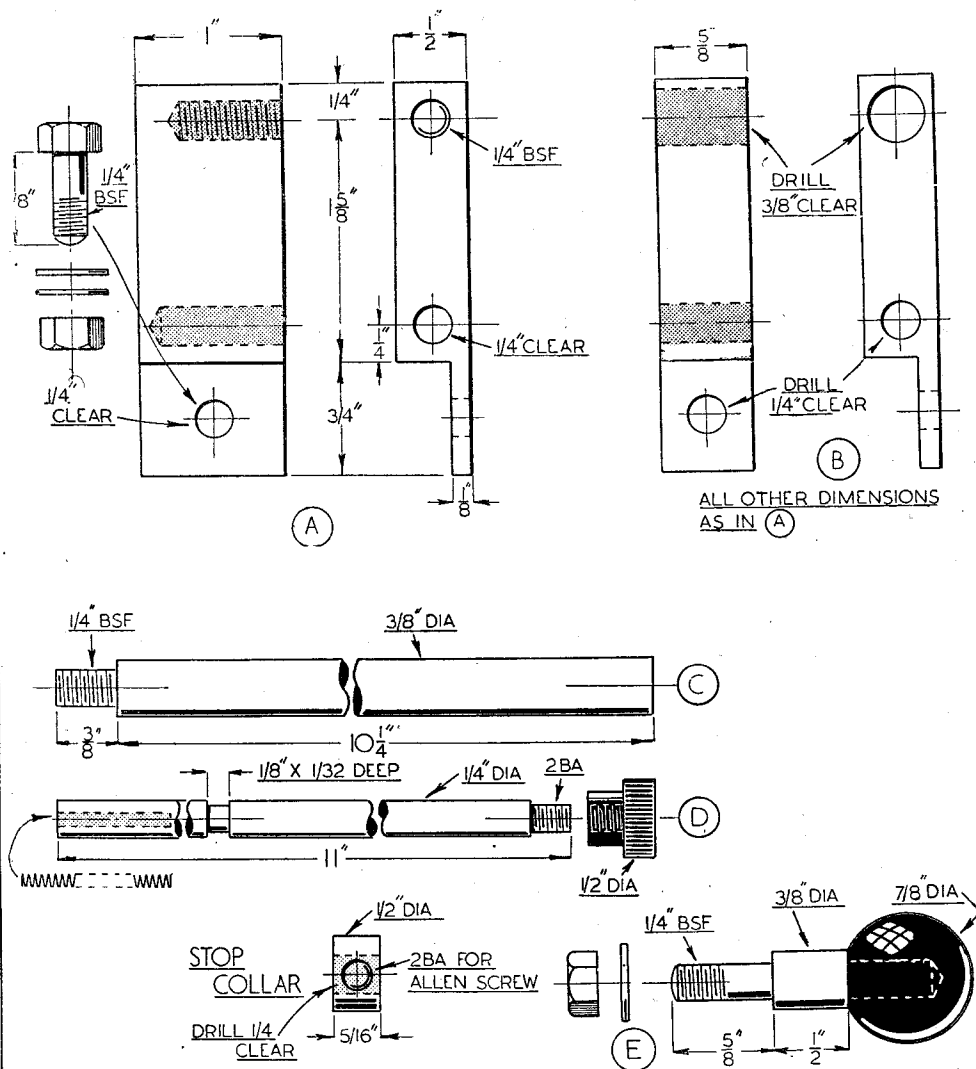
A—Left-hand weight shaft bracket ; B—Right-hand bracket ; C—The weight shaft ; D—Control-rod and stop-collar ; E—Beam-raising bolt and knob
